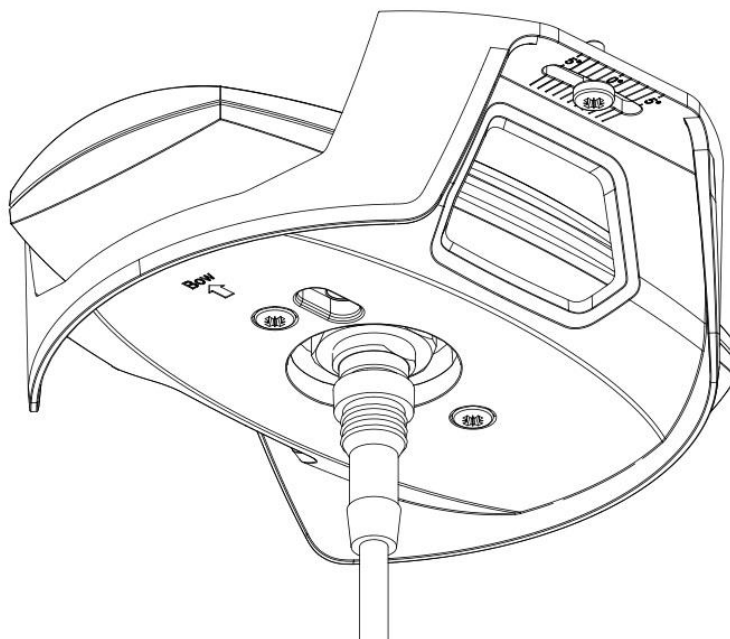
ROOF MOUNT INSTALLATION STEP 9 (INSTALL THE SIMPLE-CUT END OF THE COMMUNICATION CABLE)
